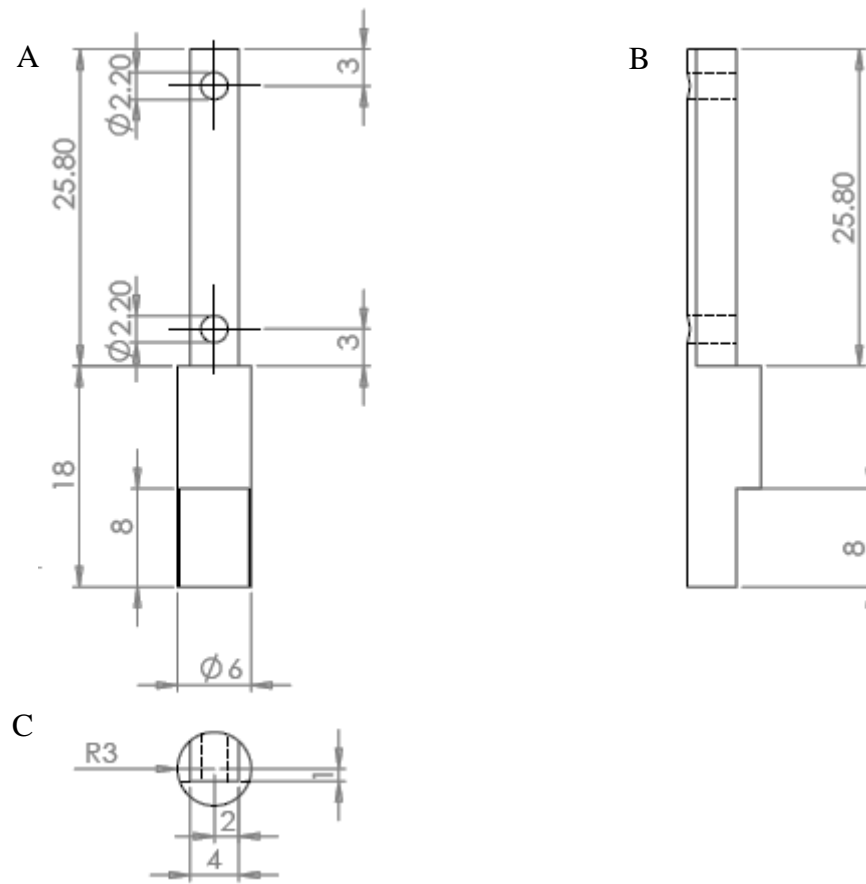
An acrylic box no.5 drawing in mm scale, (A) side view, (B) front view and (C) top view.
